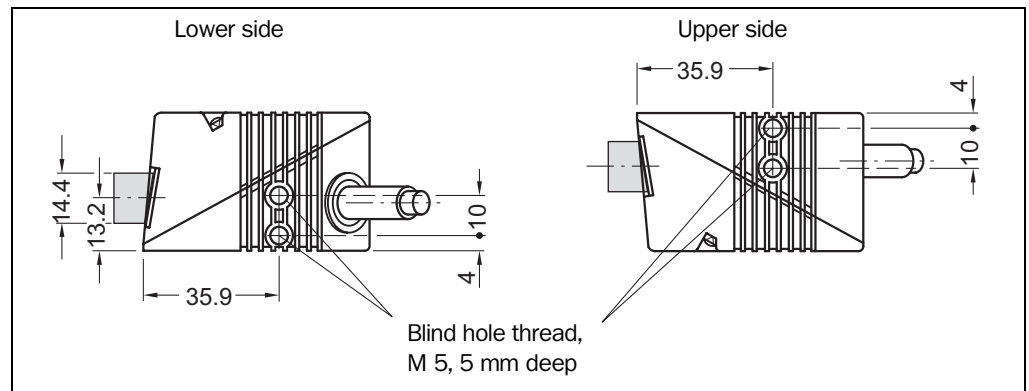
Example of line scanner: Position of the fastening thread at the CLV
